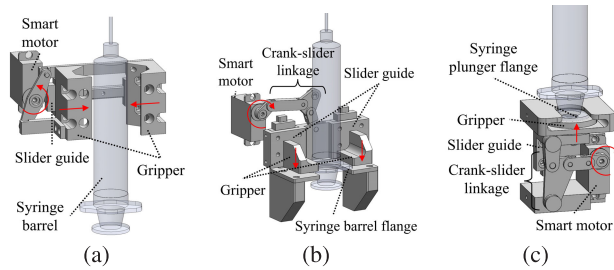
Structure of the syringe gripping mechanism. (a) Barrel. (b) Barrel flange. (c) Plunger flange.
